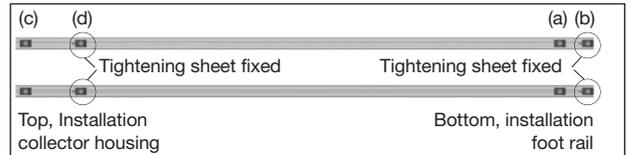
Collector housing with compression connection (Illustr. OKP 20)
